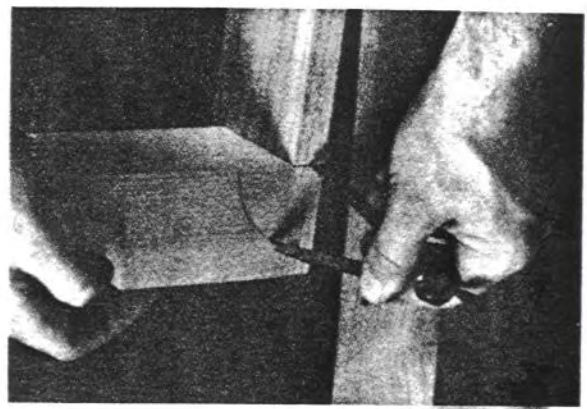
Locate the radius for the roller by placing the chassis on a piece of 3/4" scrap
